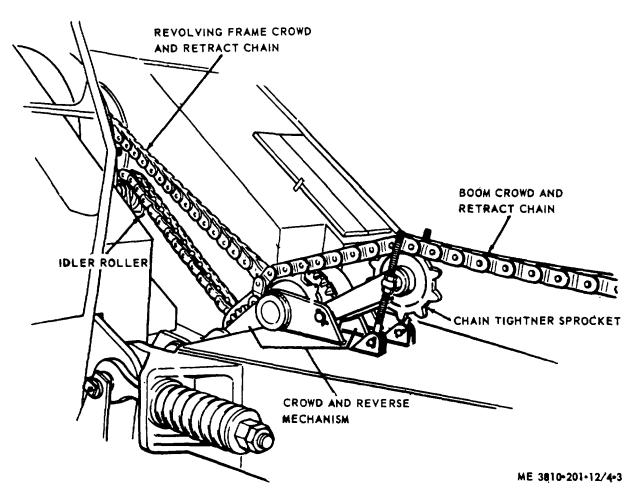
Crowd and retract chain, removal, installation, and adjustment.
